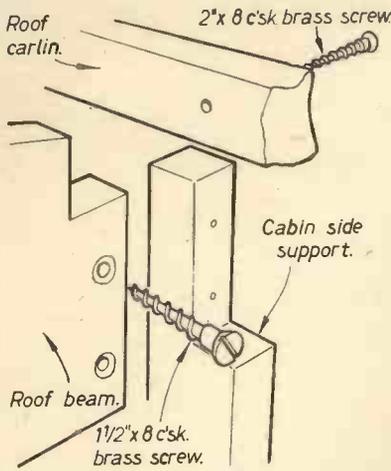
Details of junction of roof beam, roof carlins, and cabin side supports.
